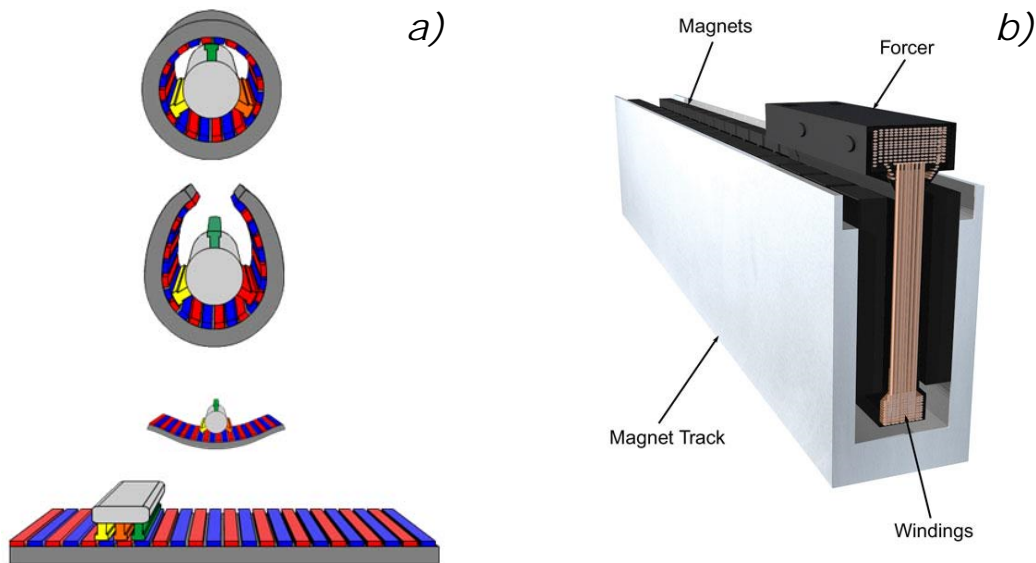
a) Sketch of synchronous electrical linear motor and b) typical industrial assembly
